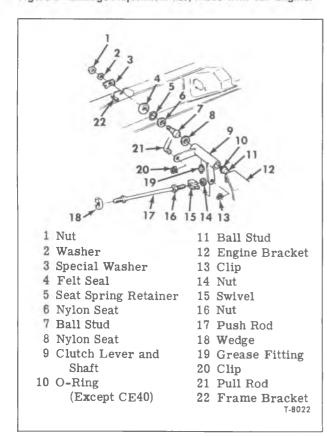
Clutch Lever and Shaft Components (In-Line Engines and CE40)
